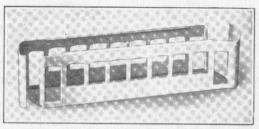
Car body formed from blank in Fig. 2. Floor, sides, ends all one piece—ready to be soldered in two places—at the ends.
